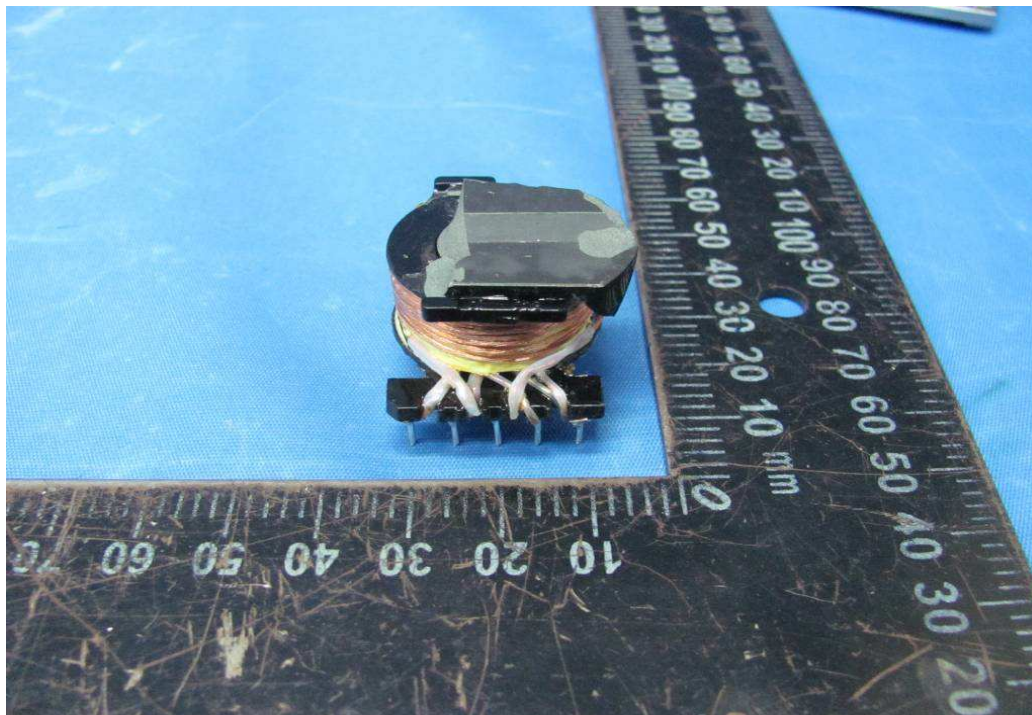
GT\*41133 series Bottom view of mains transformer (The ferrite core is wrapped around 2 layers of insulating tape.)
